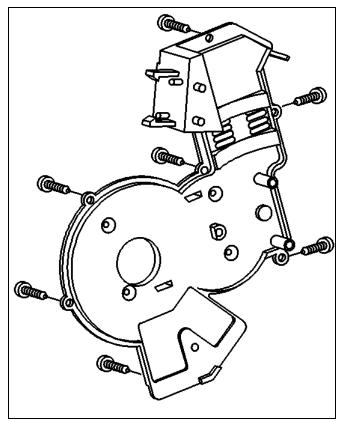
Screws Securing the Brew Unit Drive Cover (CVA 610)
